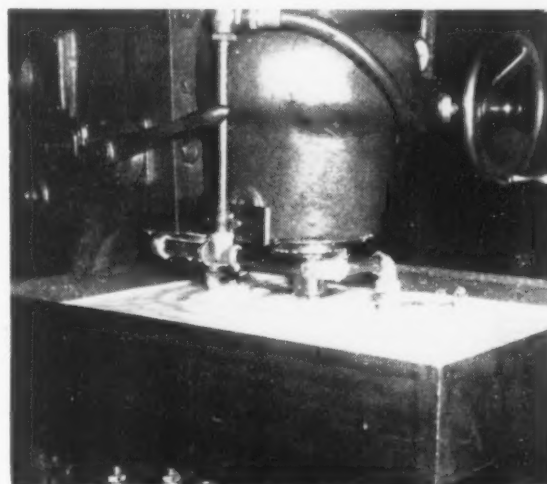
Tool life test set up with cutter and workpiece completely immersed in the water soluble oil emulsion.
